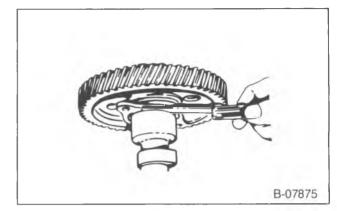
Measuring Camshaft Thrust Plate Clearance (Camshaft End Play)
